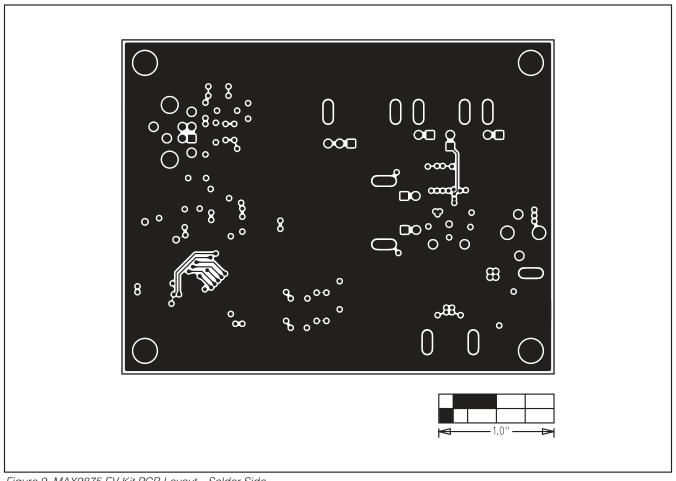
MAX9875 EV Kit PCB Layout—Solder Side
